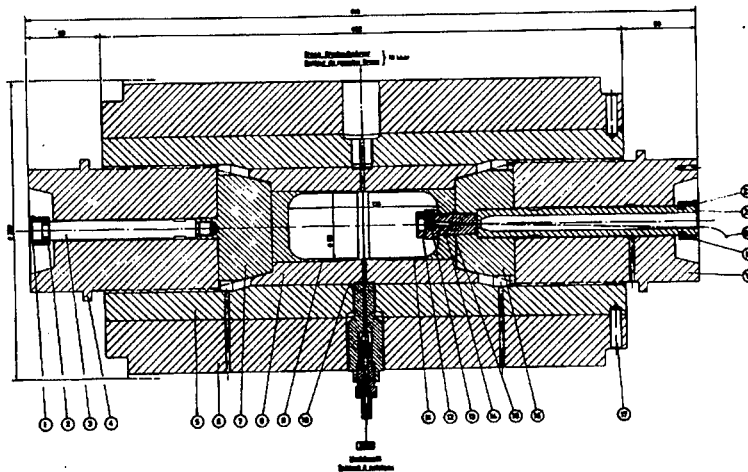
cross-sectional view of a high-pressure closed vessel up to 1 GPa
